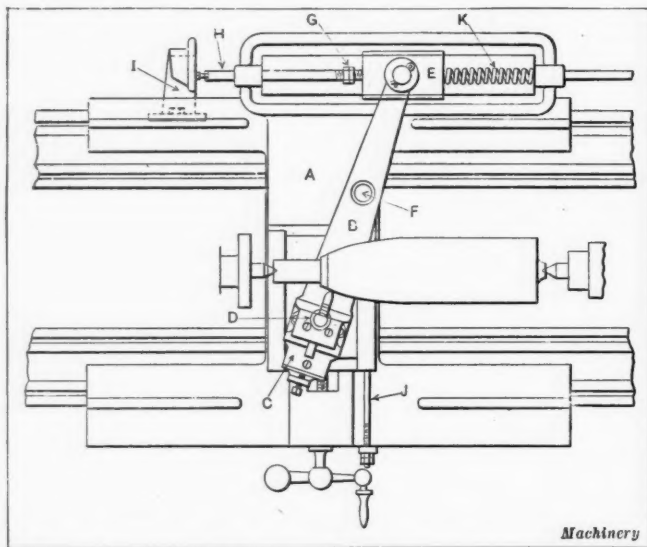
Shell Turning Attachment with Tool turning Nose of Shell
